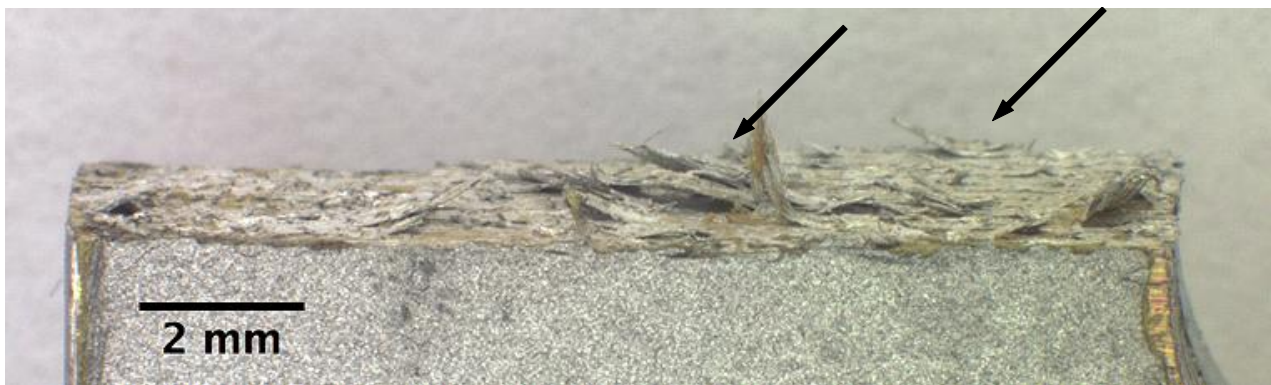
Side view of the support strut fracture surface showing grains of metal lifting up from the surface (examples arrowed), typical of stress corrosion cracking in wrought aluminium alloys
